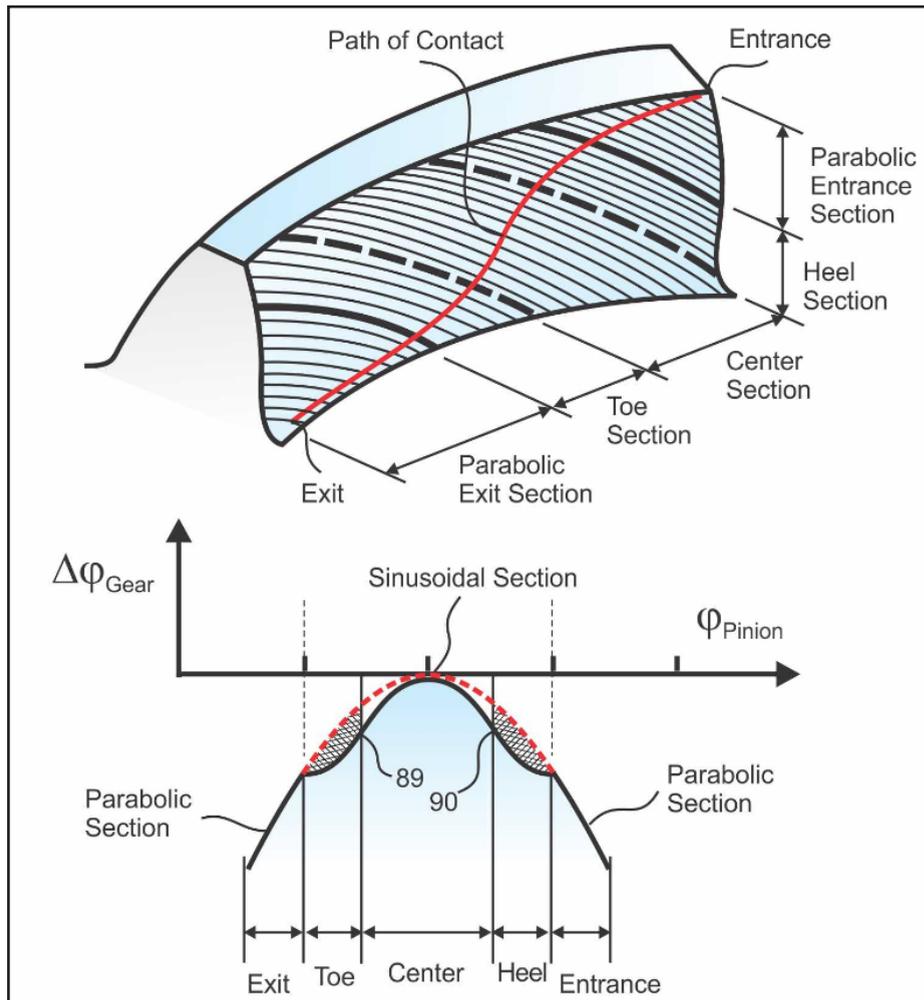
Universal motion tooth sections for hybrid motion graph or sinusoidal grinding wheel profile modification.
